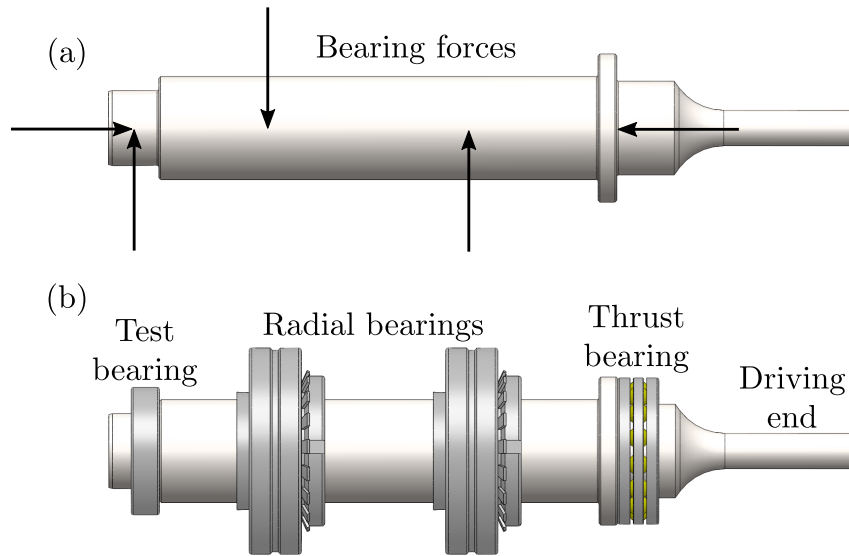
Chosen shaft design and bearing placements. (a) Counteracting forces on all the bearings. (b) Position of the required bearings.
